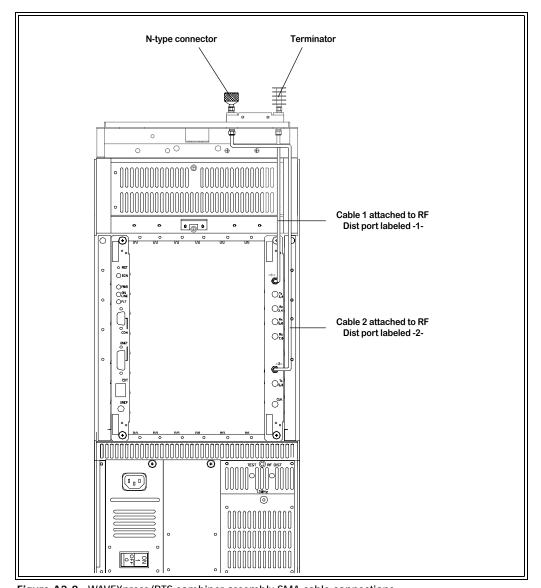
WAVEXpress/BTS combiner assembly SMA cable connections
